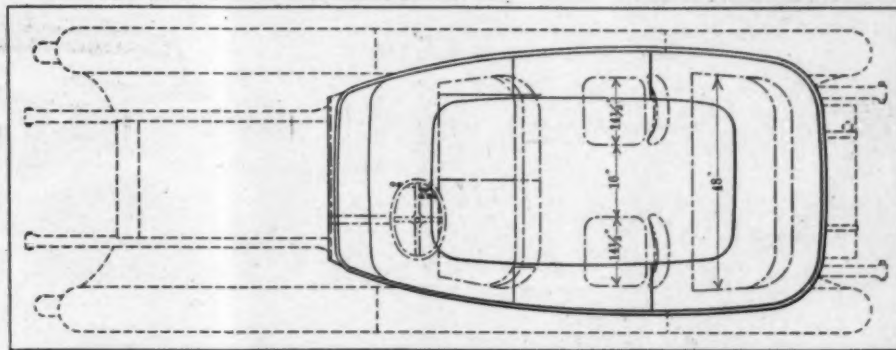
Plan view showing the roomy arrangement of seats and location of steering wheel
